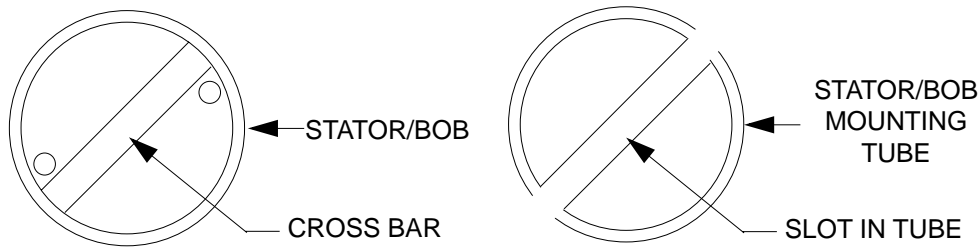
Stator/Bob Mounting Tube Alignment (End View)
